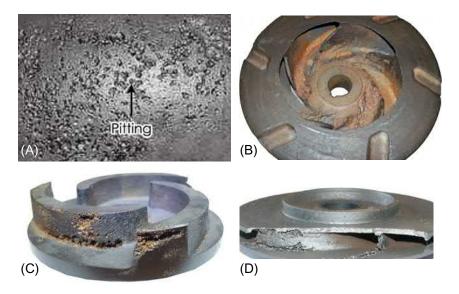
Cavitation damage: (A) impeller pitting; (B) cavitation at impeller inlet; (C) cavitation of inlet vanes; (D) cavitation at impeller eye and inlet vanes.
